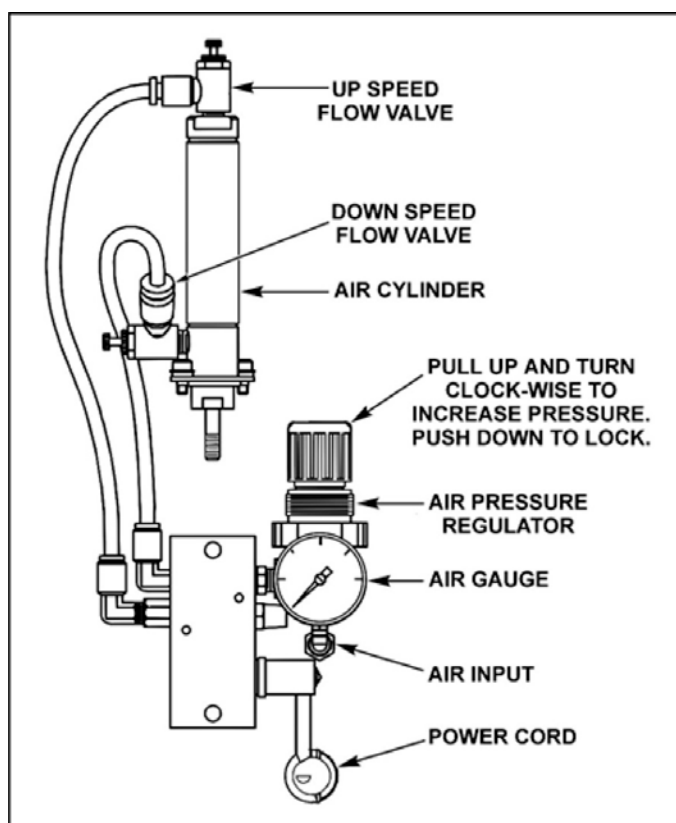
Typical Solenoid Air Valve Assembly with a Single Regulator
